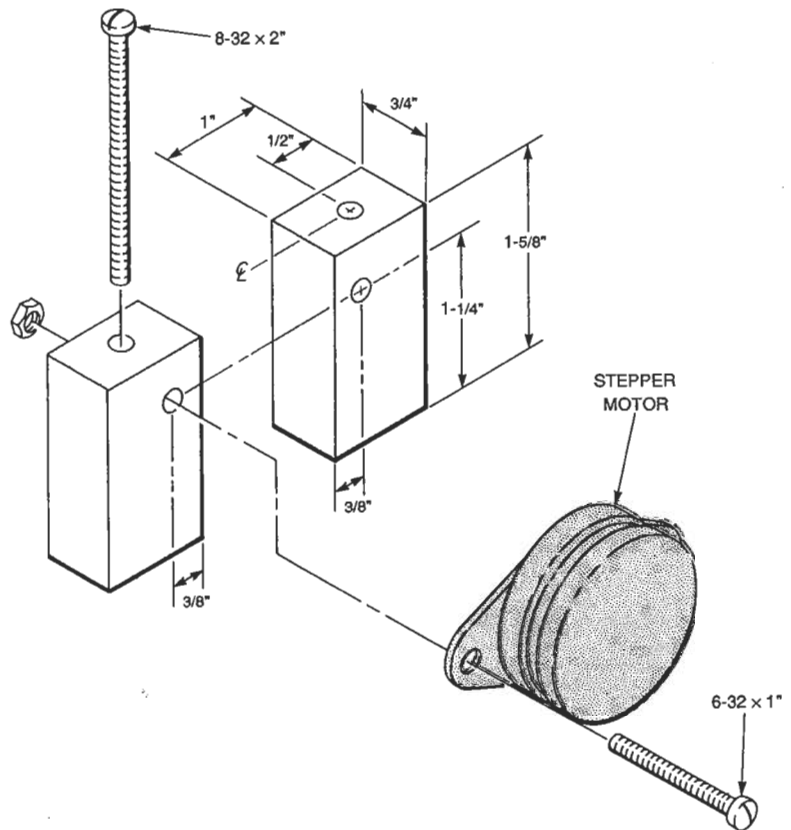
The mounting blocks for the table stepper motor screw directly to the base plate.
